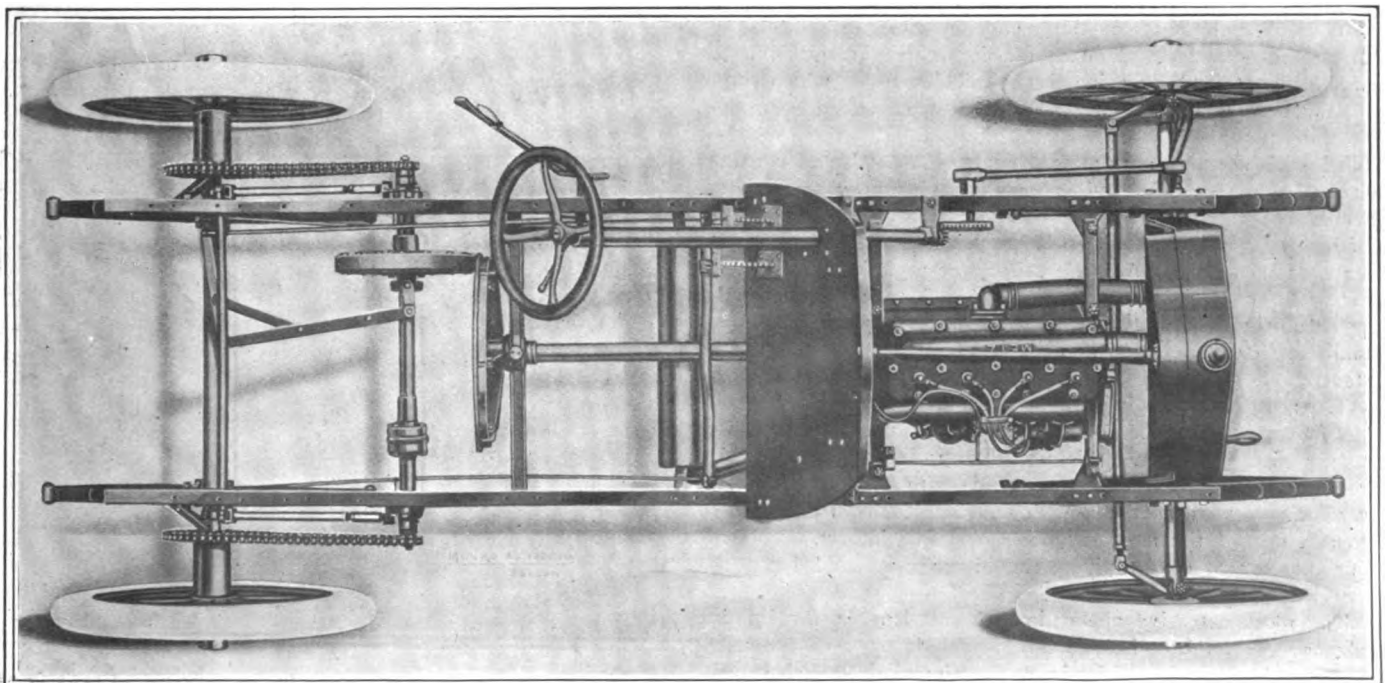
Plan view of the standard Metz chassis, showing friction drive
